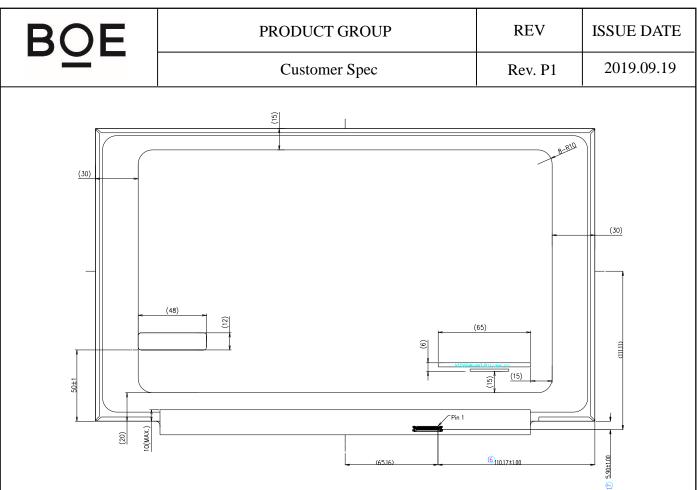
TFT-LCD Module Outline Dimensions (Rear view)
